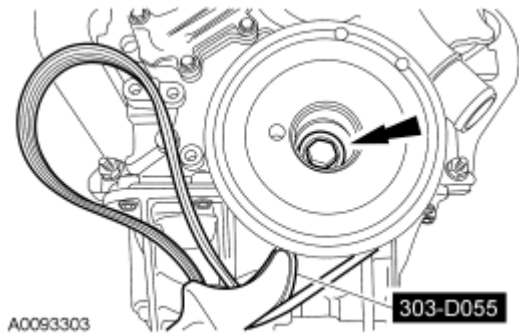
Holding Crankshaft Pulley Using Special Tool
